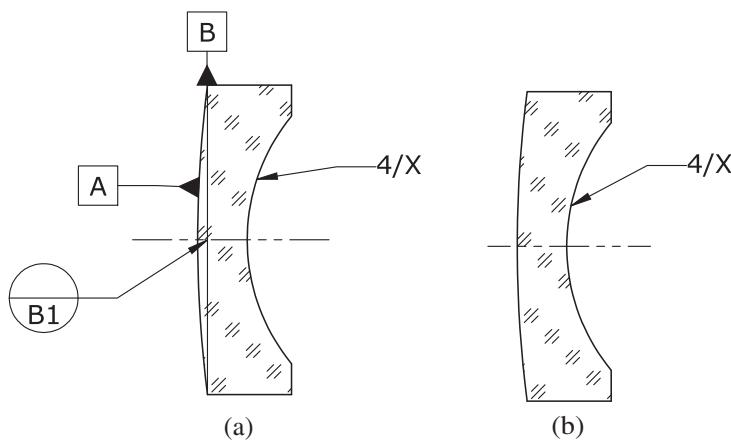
Sample optical element where the centering tolerance (surface tilt) for the right surface is (a) explicitly defined and (b) implicitly defined without the datum where the tolerance is the $4/x$ indicator and quantifier.
